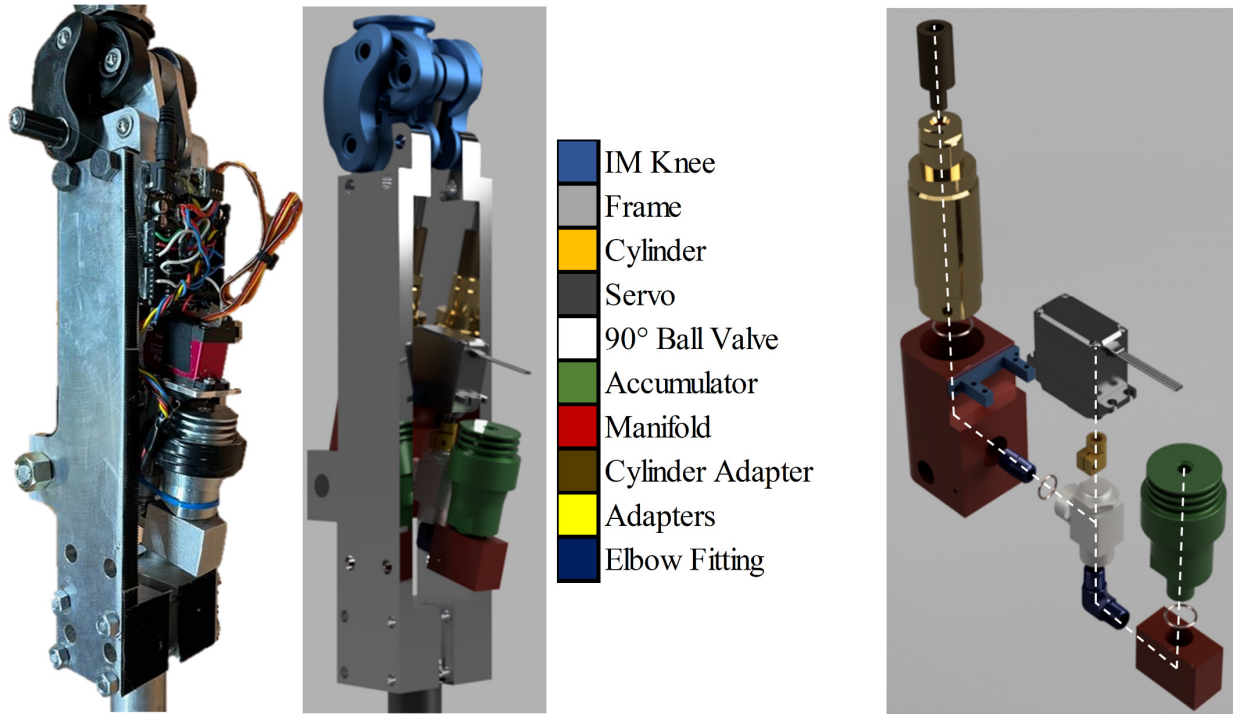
Assembled prototype 1 knee system. Left shows actual assembly. Middle and right show rendering of the full assembly and the hydraulic system in detail, respectively. A legend is included to label the various components.
